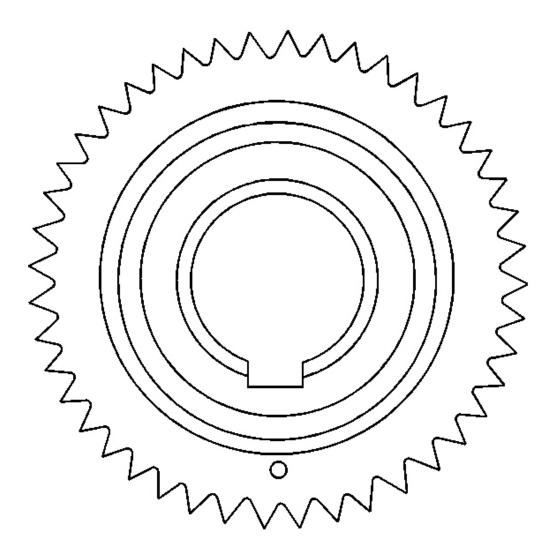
Balance Shaft Driven Gear Timing Mark Courtesy of GENERAL MOTORS CORP.
